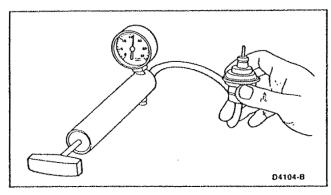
Testing Transmission Vacuum Unit for Leakage
